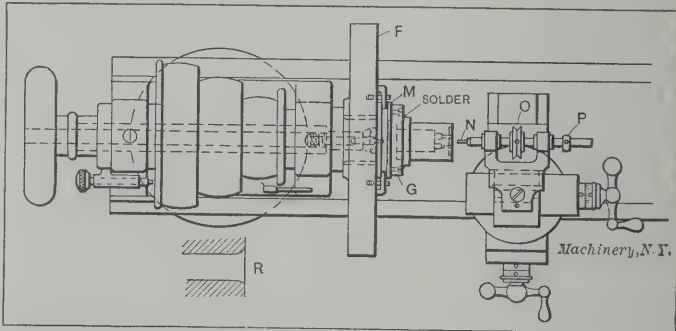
Finishing the Hole in a Bench Lathe with a Diamond Lap
